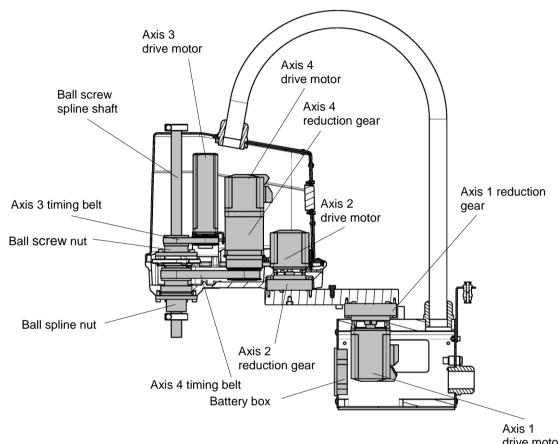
Layout of robot mechanical components (KHL-300, KHL-400)
